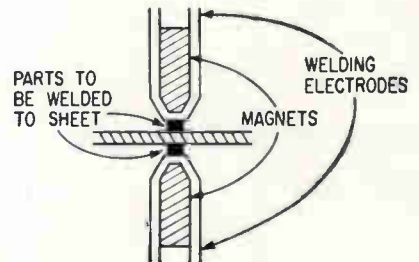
Rod magnets placed in hollowed electrodes hold small parts during spot welding
